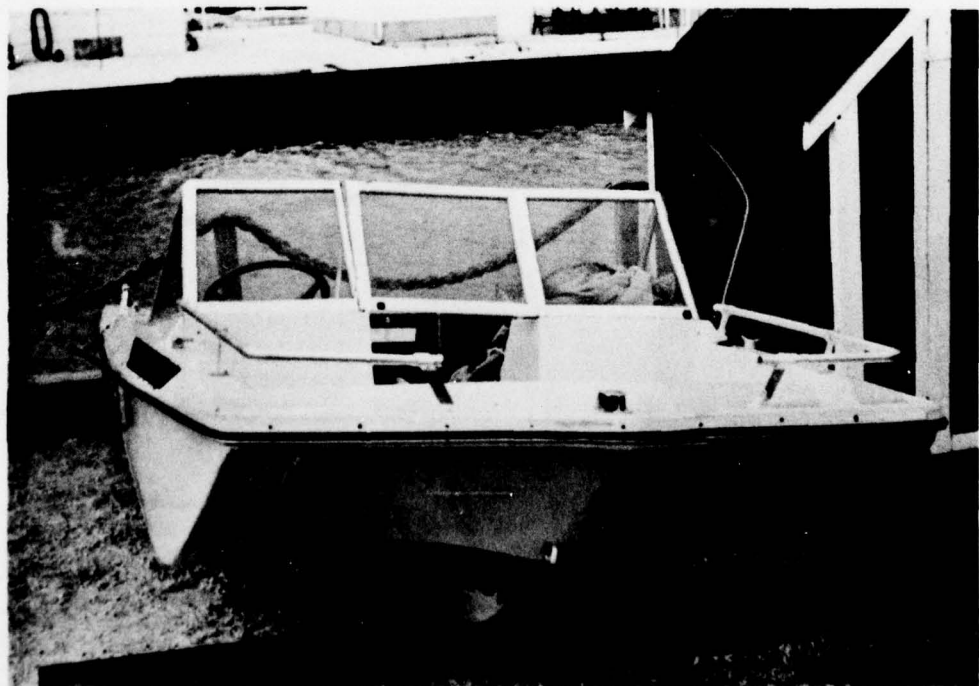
14' (4.3 M) RUNABOUT. NOTE OPEN RIVET HOLES ABOVE RUB RAIL WHERE DECK POPPED LOOSE
